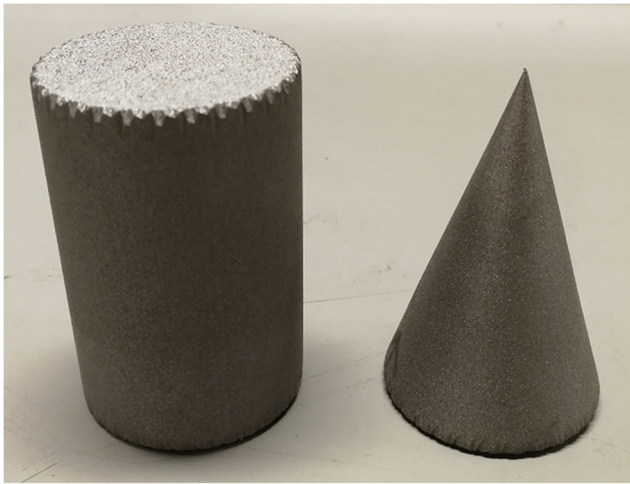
3D-printed 60 mm high, cylinder and cone parts (obtained using 65 W laser power)
